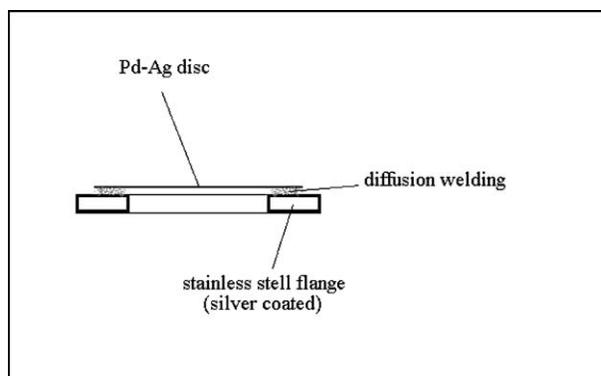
Scheme of a joint between a Pd-Ag disc and a stainless flange.
